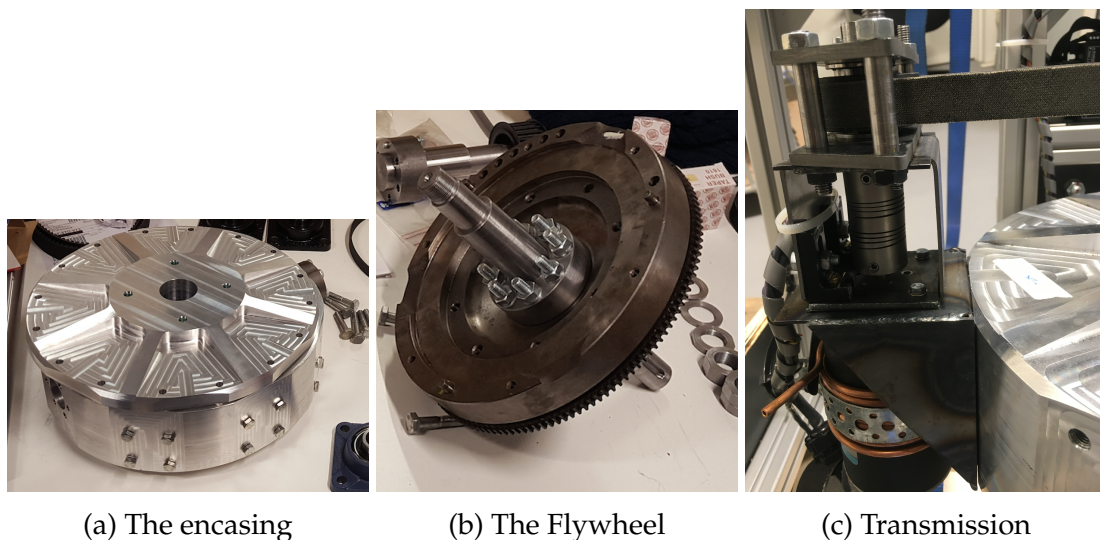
The encasing that holds the flywheel (a). The flywheel mounted on the flywheel axis (b). The transmission from the motor that spins up the flywheel, which is supported by two bearings, and geared 2:1 through pulley wheels with belt transmission (c).
